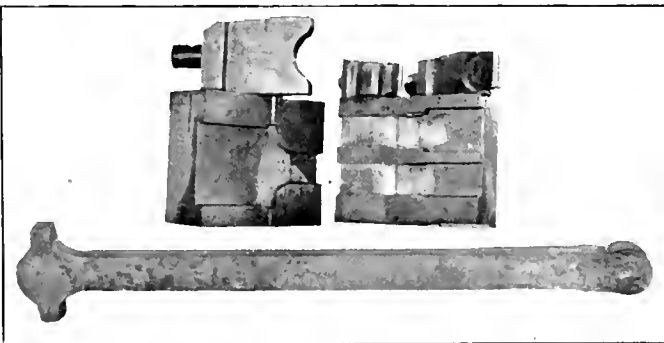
Dies for Forming Back Section of Side Rod; Chicago & North Western.
